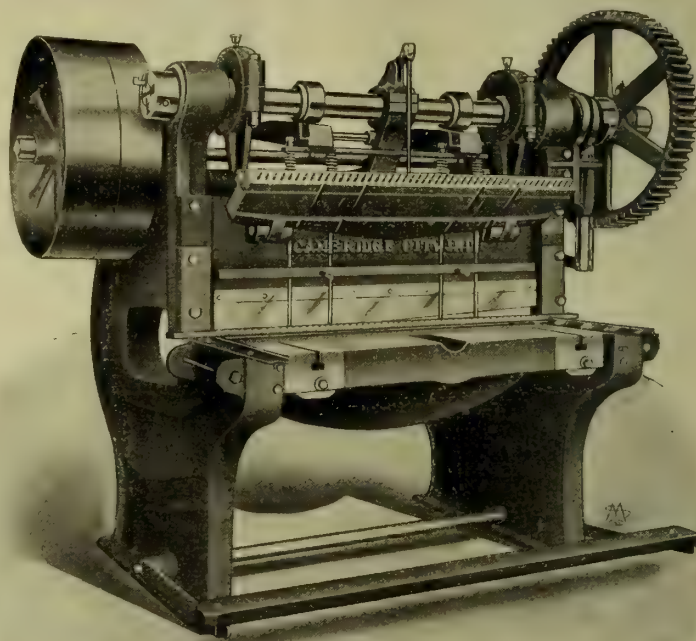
Shear and Punch With Punch-Cross-Head Disengaged, Making It a Regular Gap Shear.
